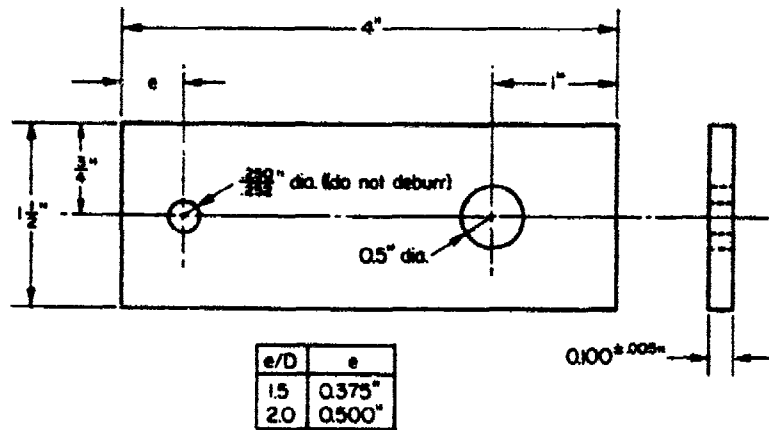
Bearing specimen for Inconel 718 and Inconel 625 bars.
